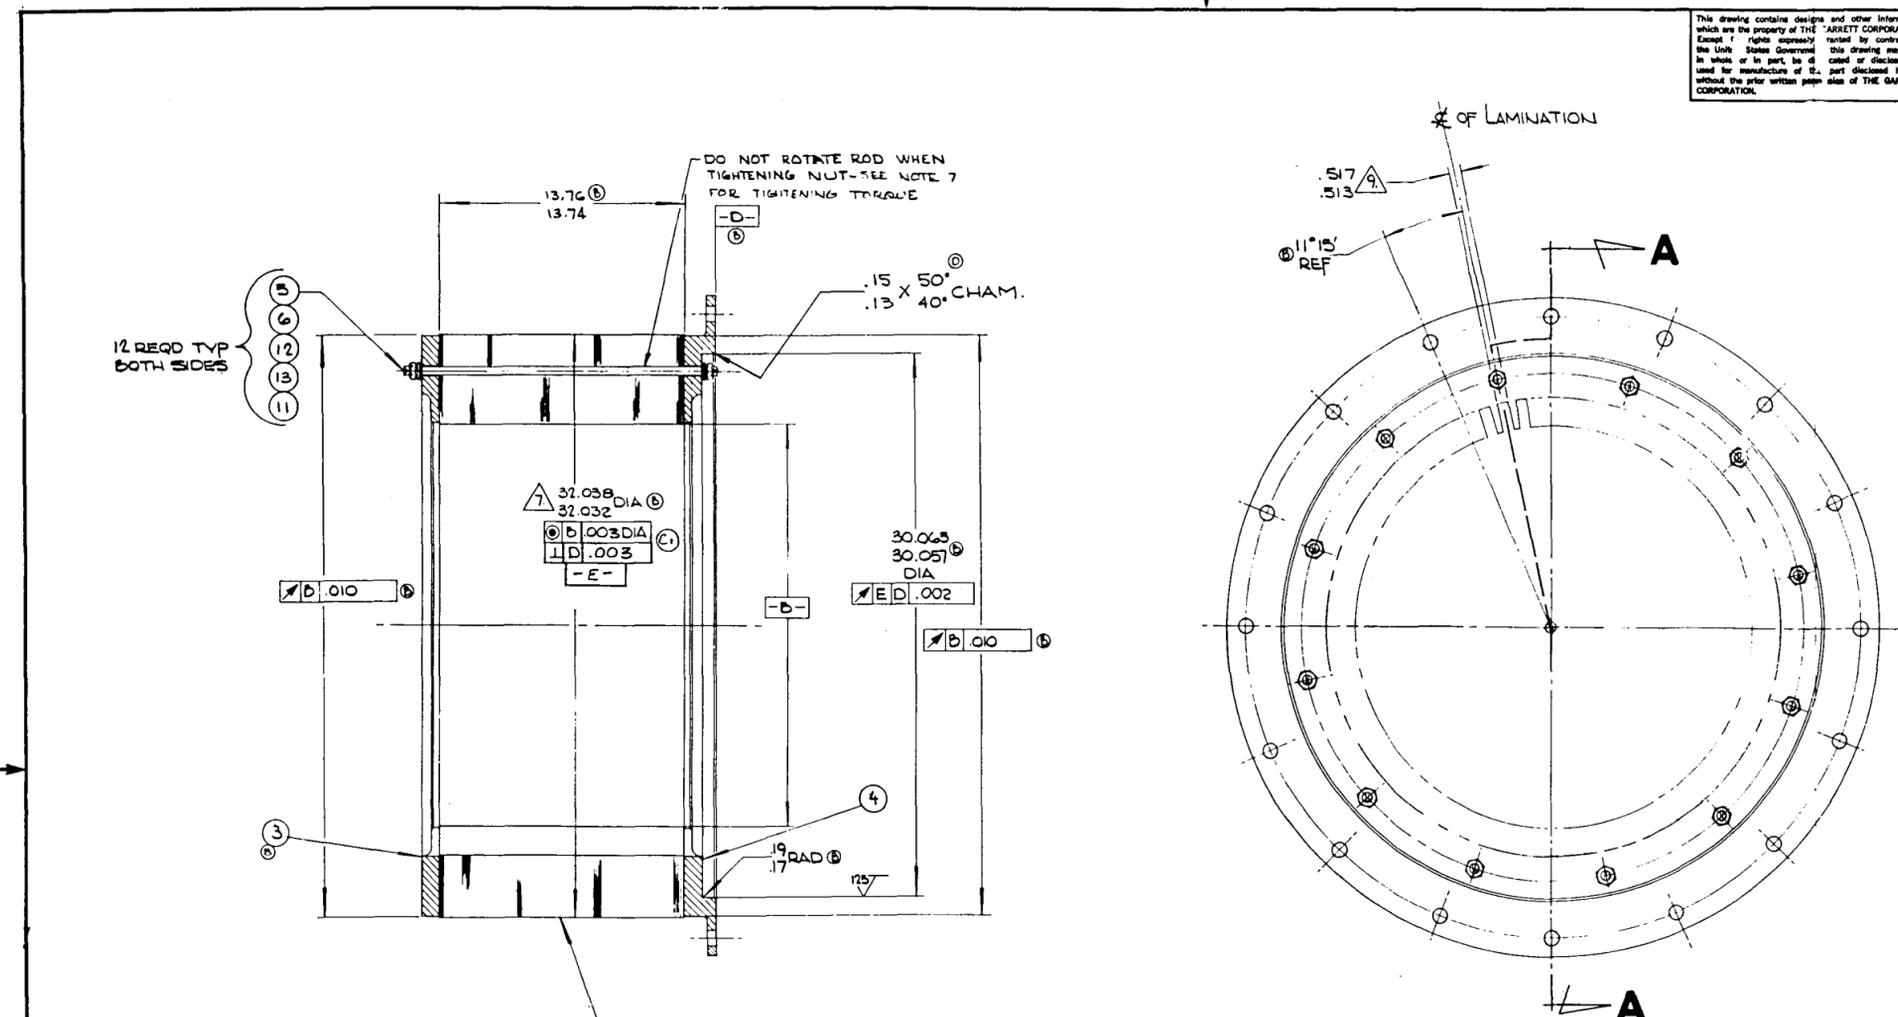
Assembly Drawing 2045162, Stator Stack Assembly
